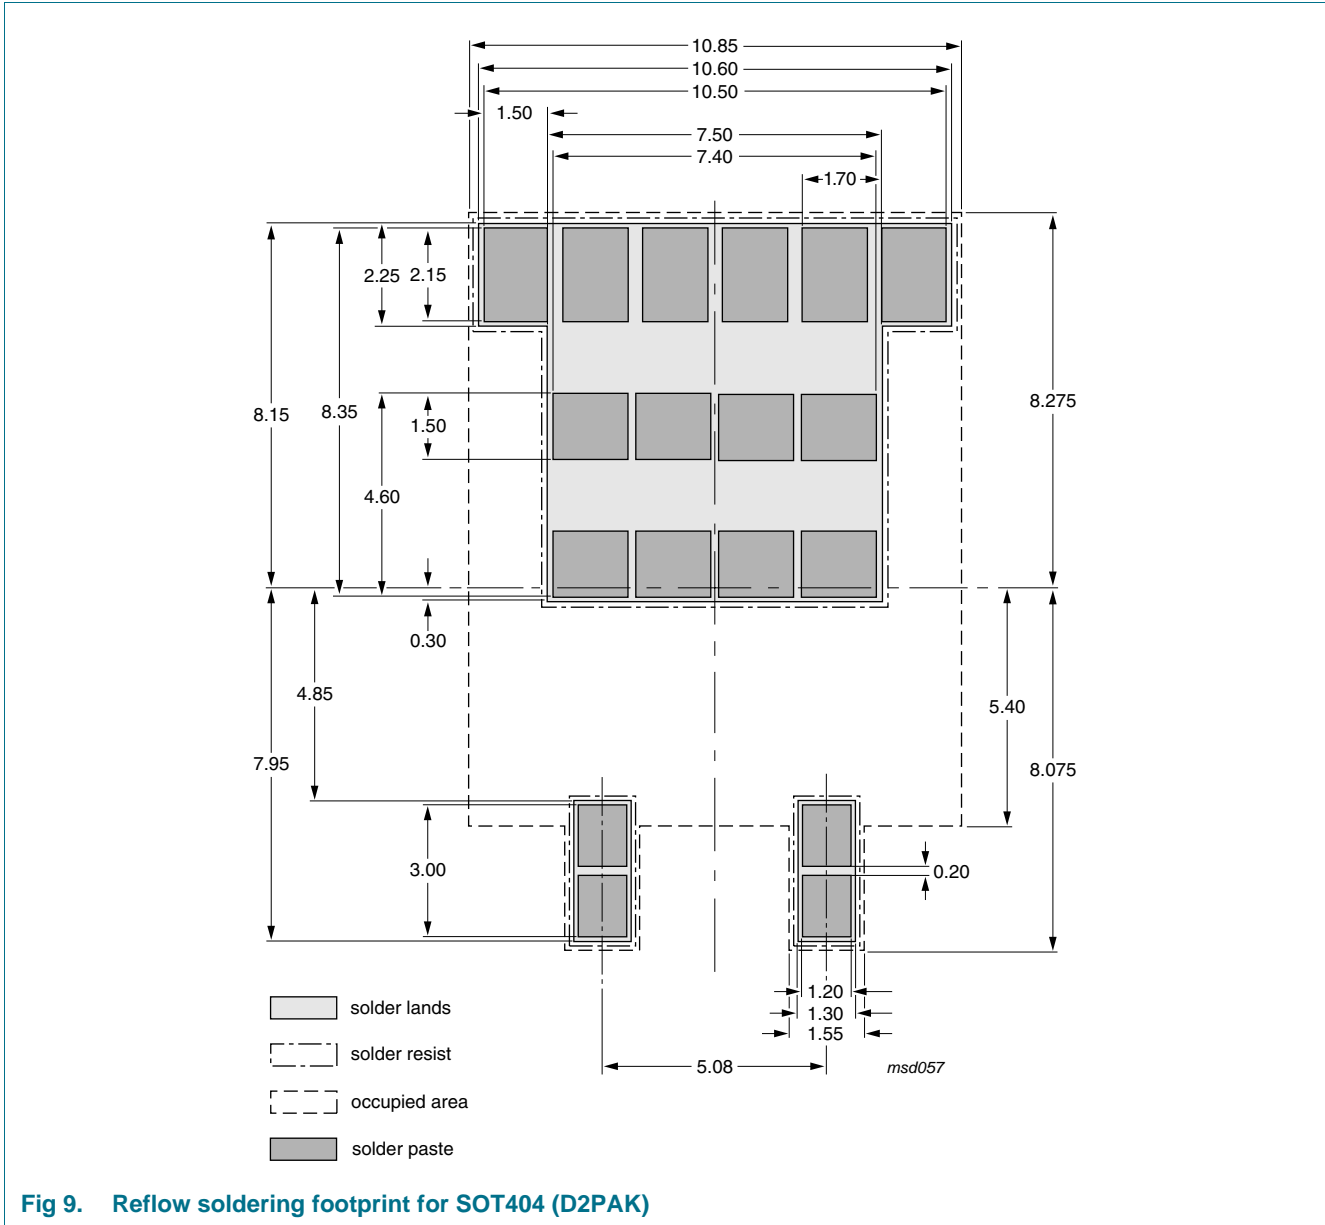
Reflow soldering footprint for SOT404 (D2PAK)
